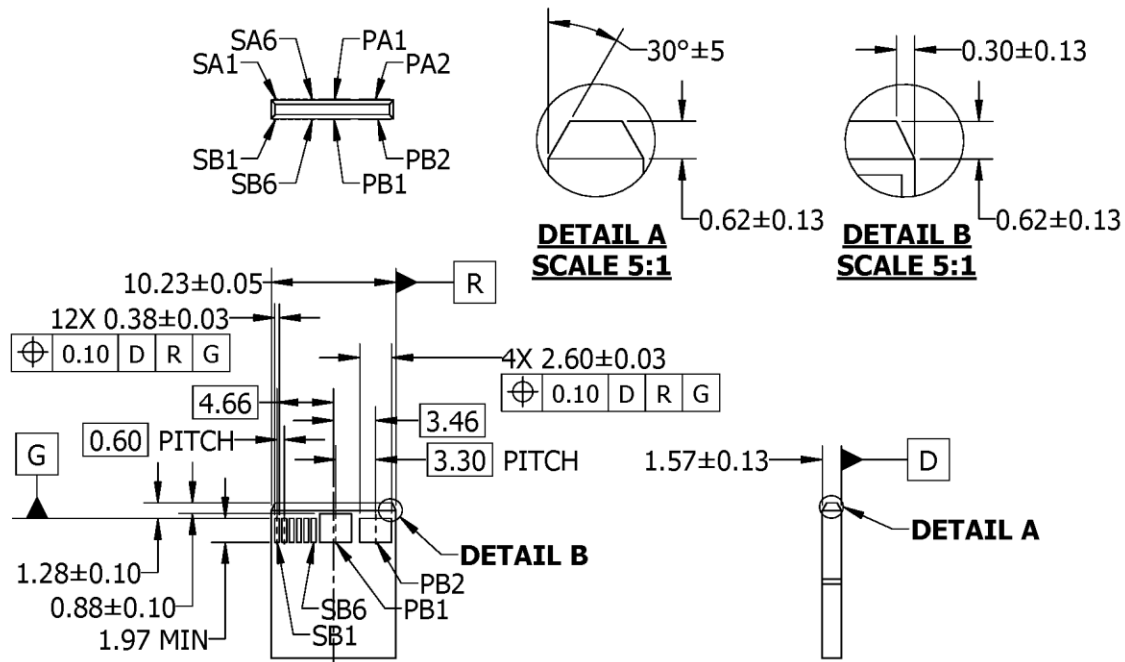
Plug Paddle Card for 21A Power Plugs
